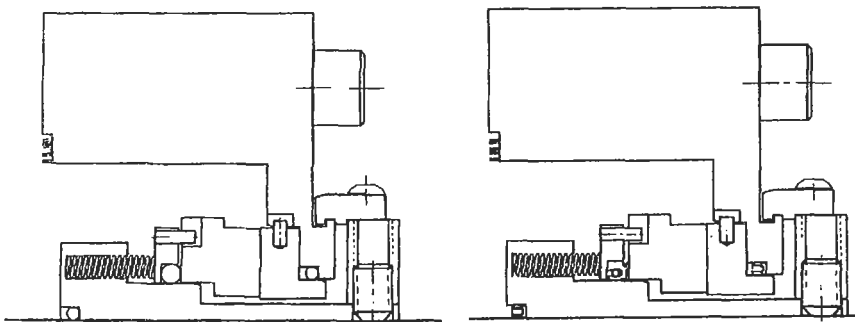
Typical flexible rotor steam turbine seal designs.
